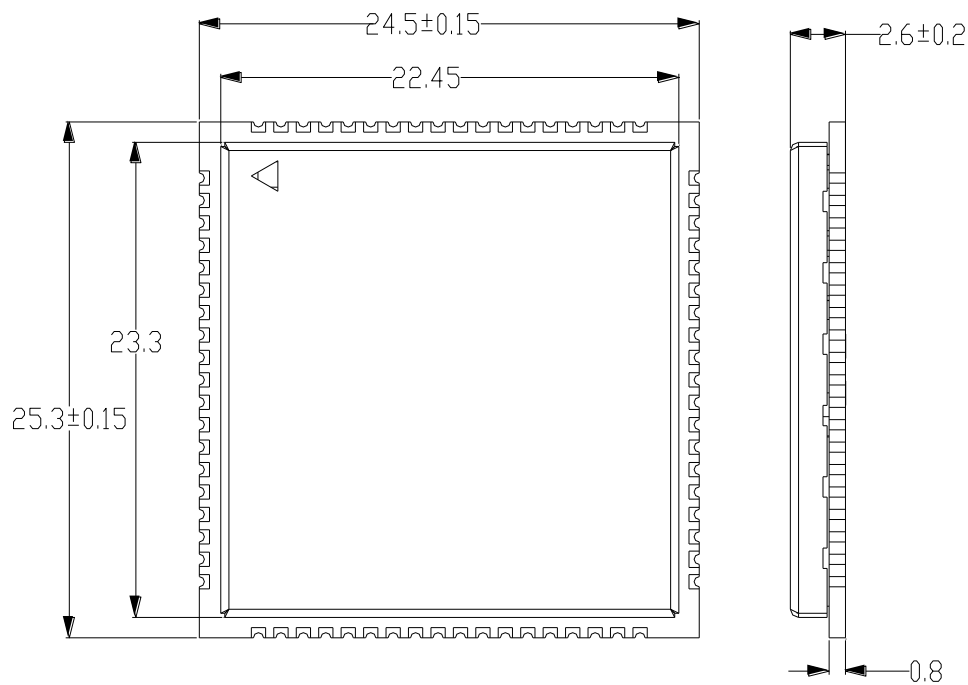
M85 Module Top and Side Dimensions (Unit: mm)
